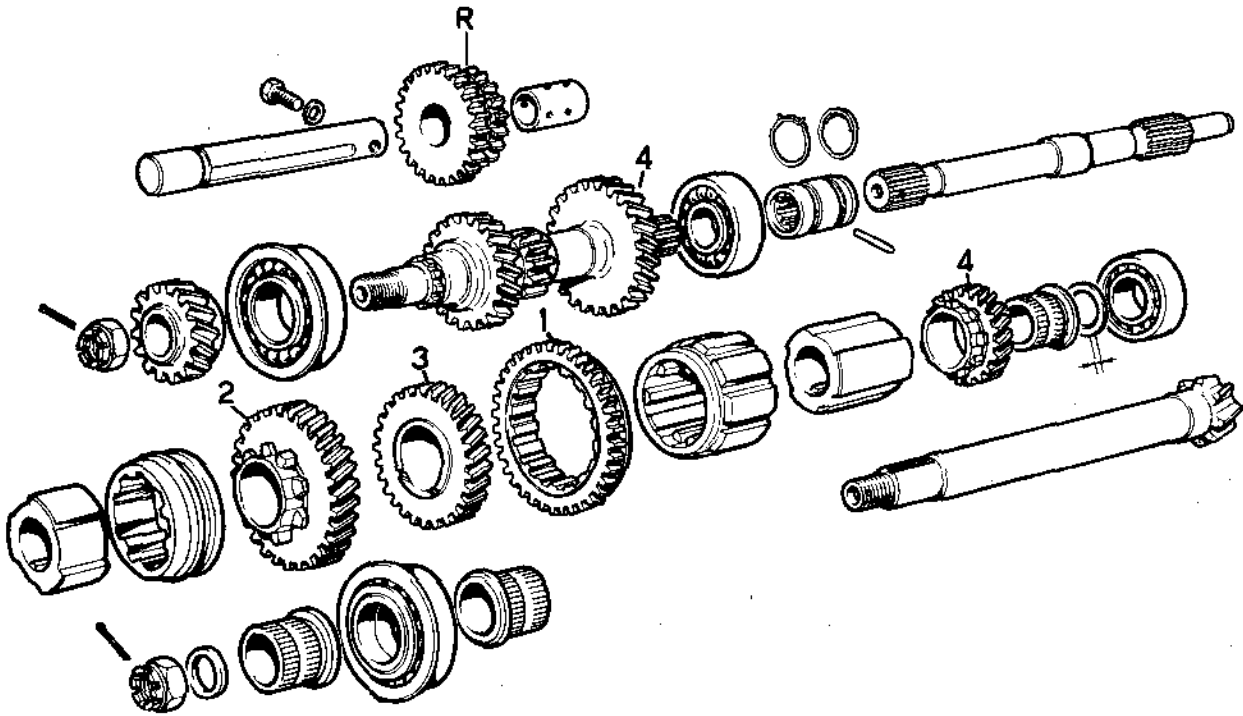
Gear clusters and shafts with actual gear numbering
